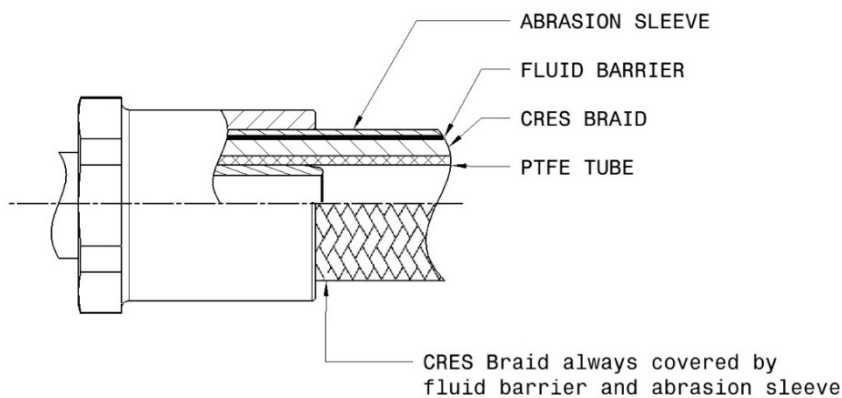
FITTING CAPTURED INTEGRAL ABRASION SLEEVE WITH FLUID BARRIER /29/
